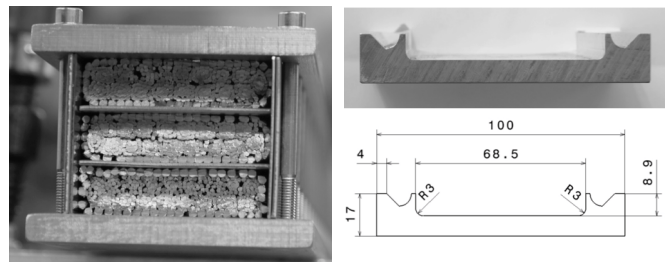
Three cable sections assembled for the heat treatment (left). Drawing and cross section of the steel conduit (right).
